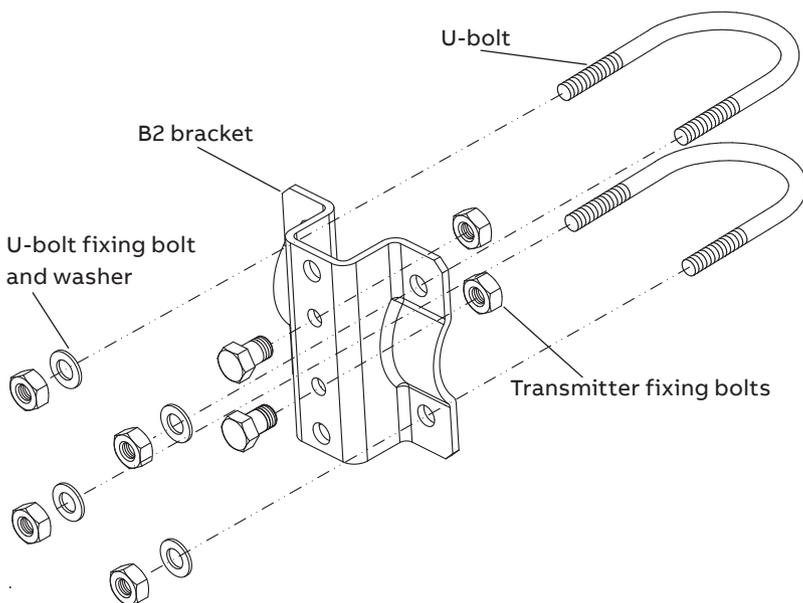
Pipe and wall mounting bracket kit (B2) for P style transmitter with DIN housing
